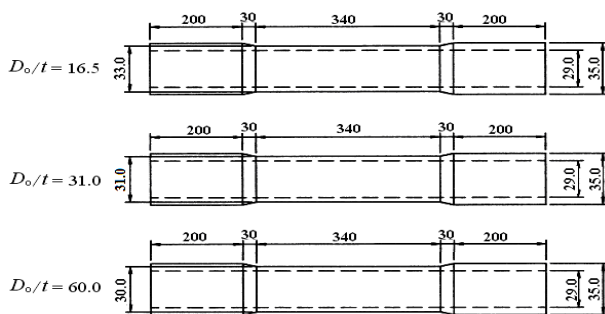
A Schematic drawing of tube's dimensions for  $D_o/t$  ratios of 16.5, 31.0 and 60.0.
